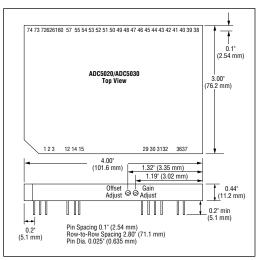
ADC5020/ADC5030 Outline Drawing & Pinouts.
